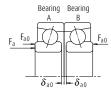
Back-to-Back Duplex Bearing Preload
